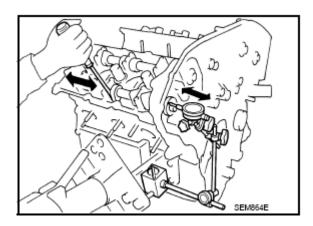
Measuring Camshaft End Play Courtesy of NISSAN MOTOR CO., U.S.A.
